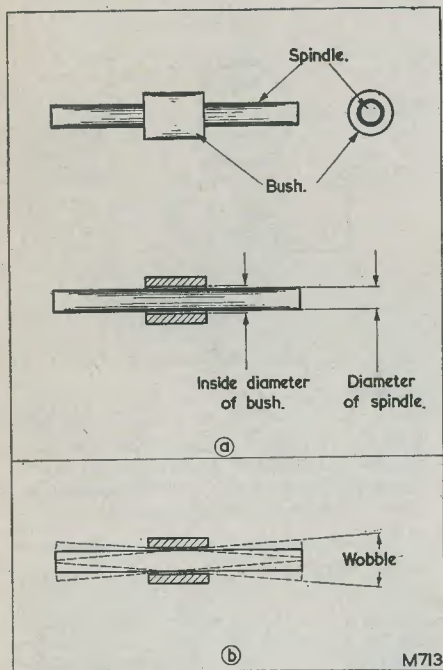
(a) A typical bush and spindle assembly. The lower diagram shows a section through the centre of the assembly. (b) The amount of spindle wobble is proportional to the clearance between spindle diameter and bush inside diameter
